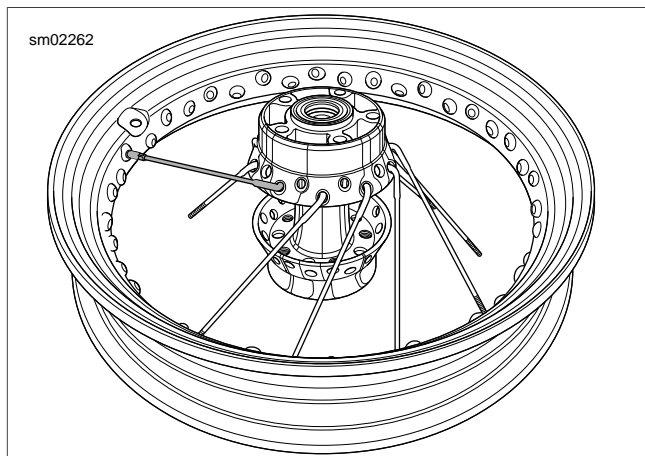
Brake Side Up: Start First Spoke of Bottom Row
